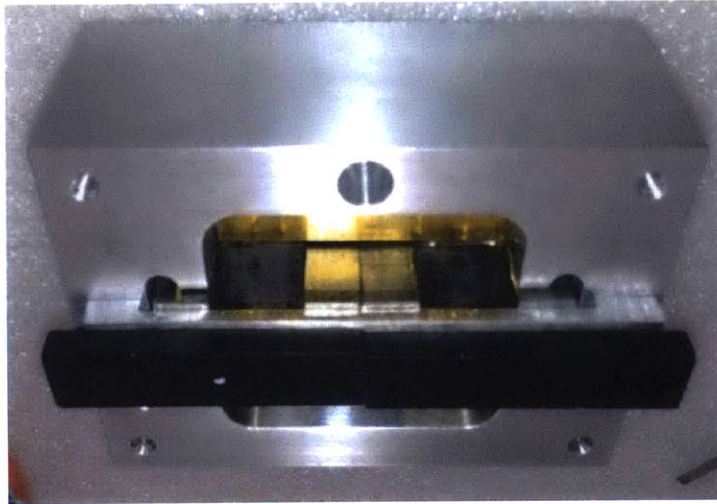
Photograph of fixture for making c-cores parallel to housing surface.
